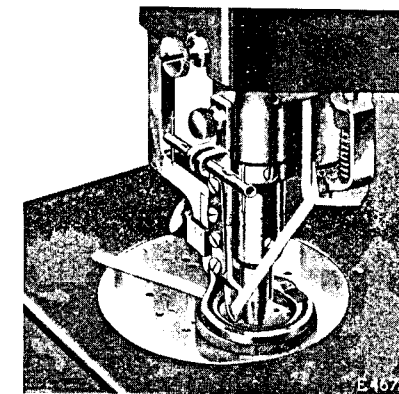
Machine 114w121 Threaded and Adjusted for Spiral Braiding
